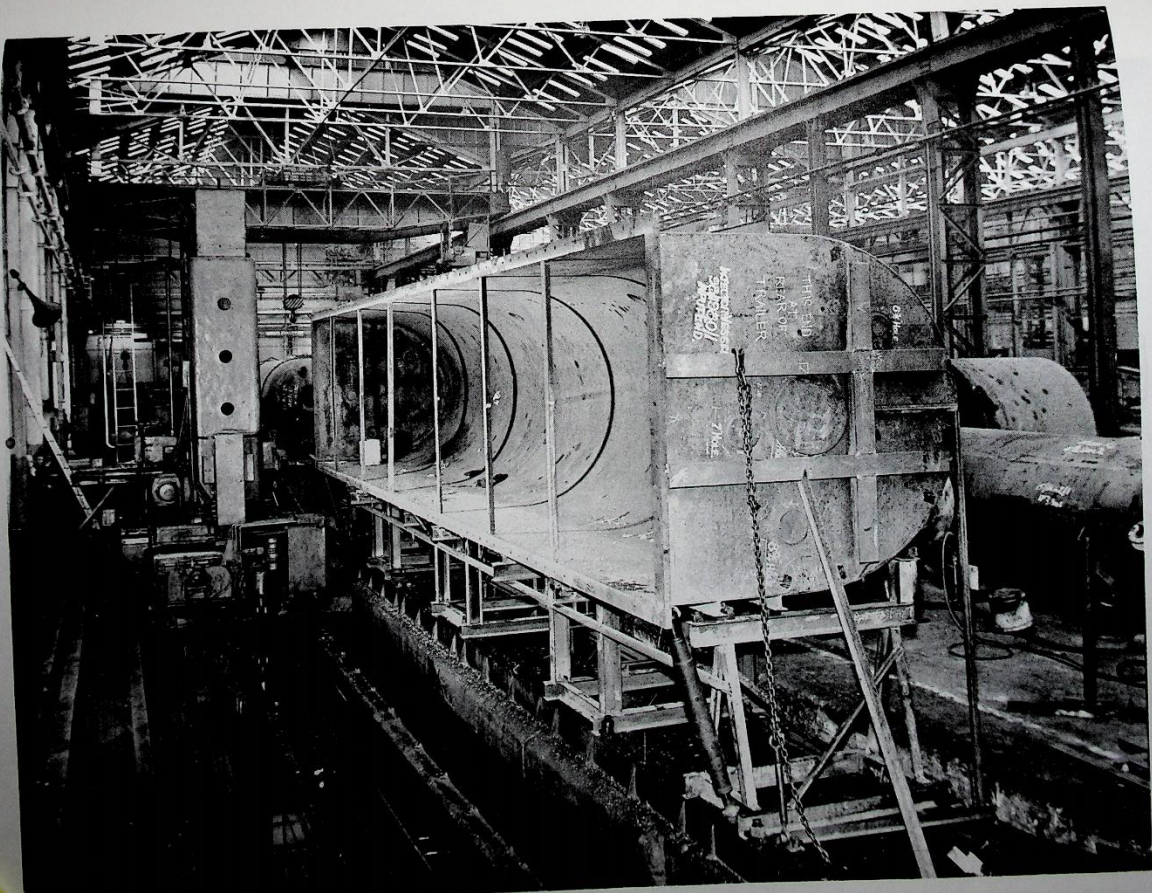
11. 2(i) Machining of the linac vacuum vessel.
